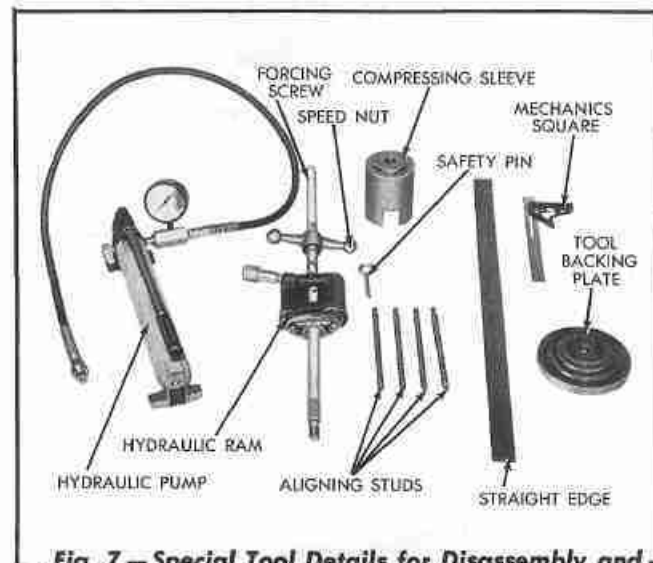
Special Tool Details for Disassembly and Assembly of Steering Clutch
